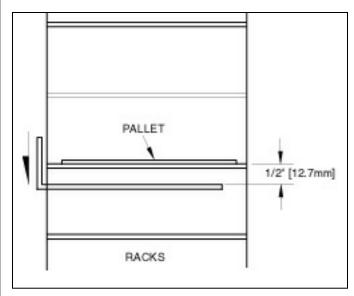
SWITCH LS-23 ADJUSTMENT.
